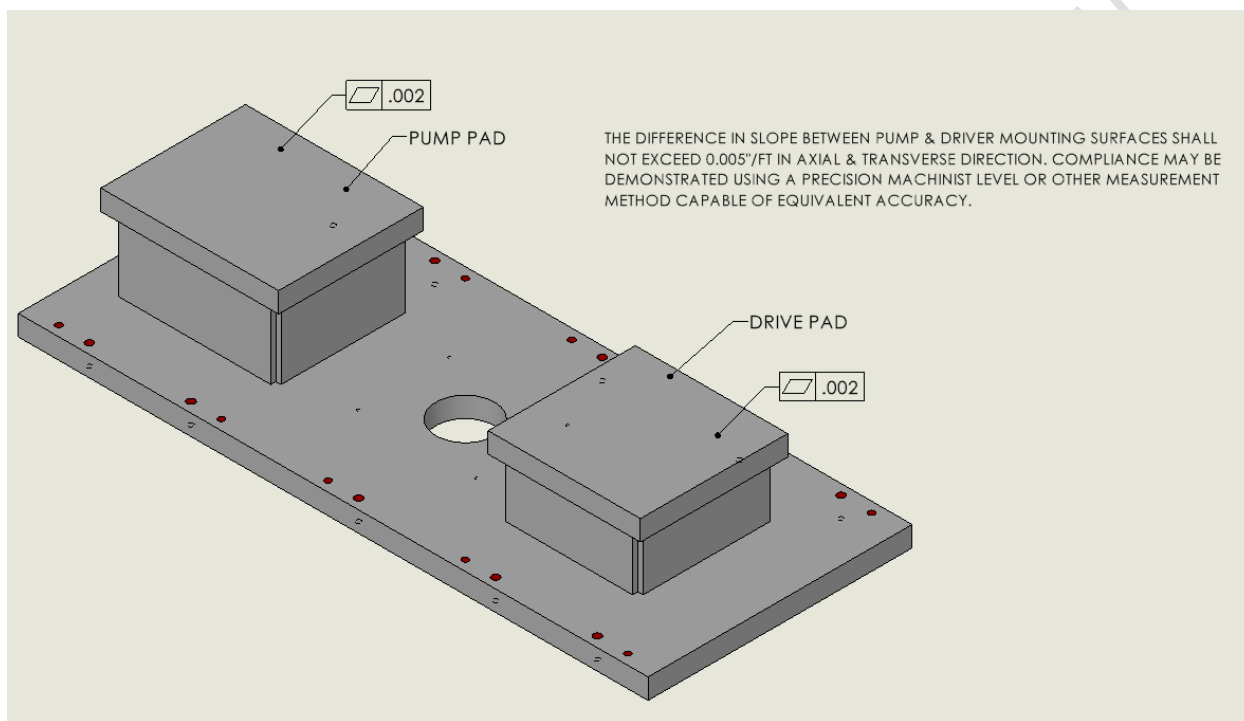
Example Oil Pump and Driver Baseplate Showing Corresponding Mounting Plane Requirement
